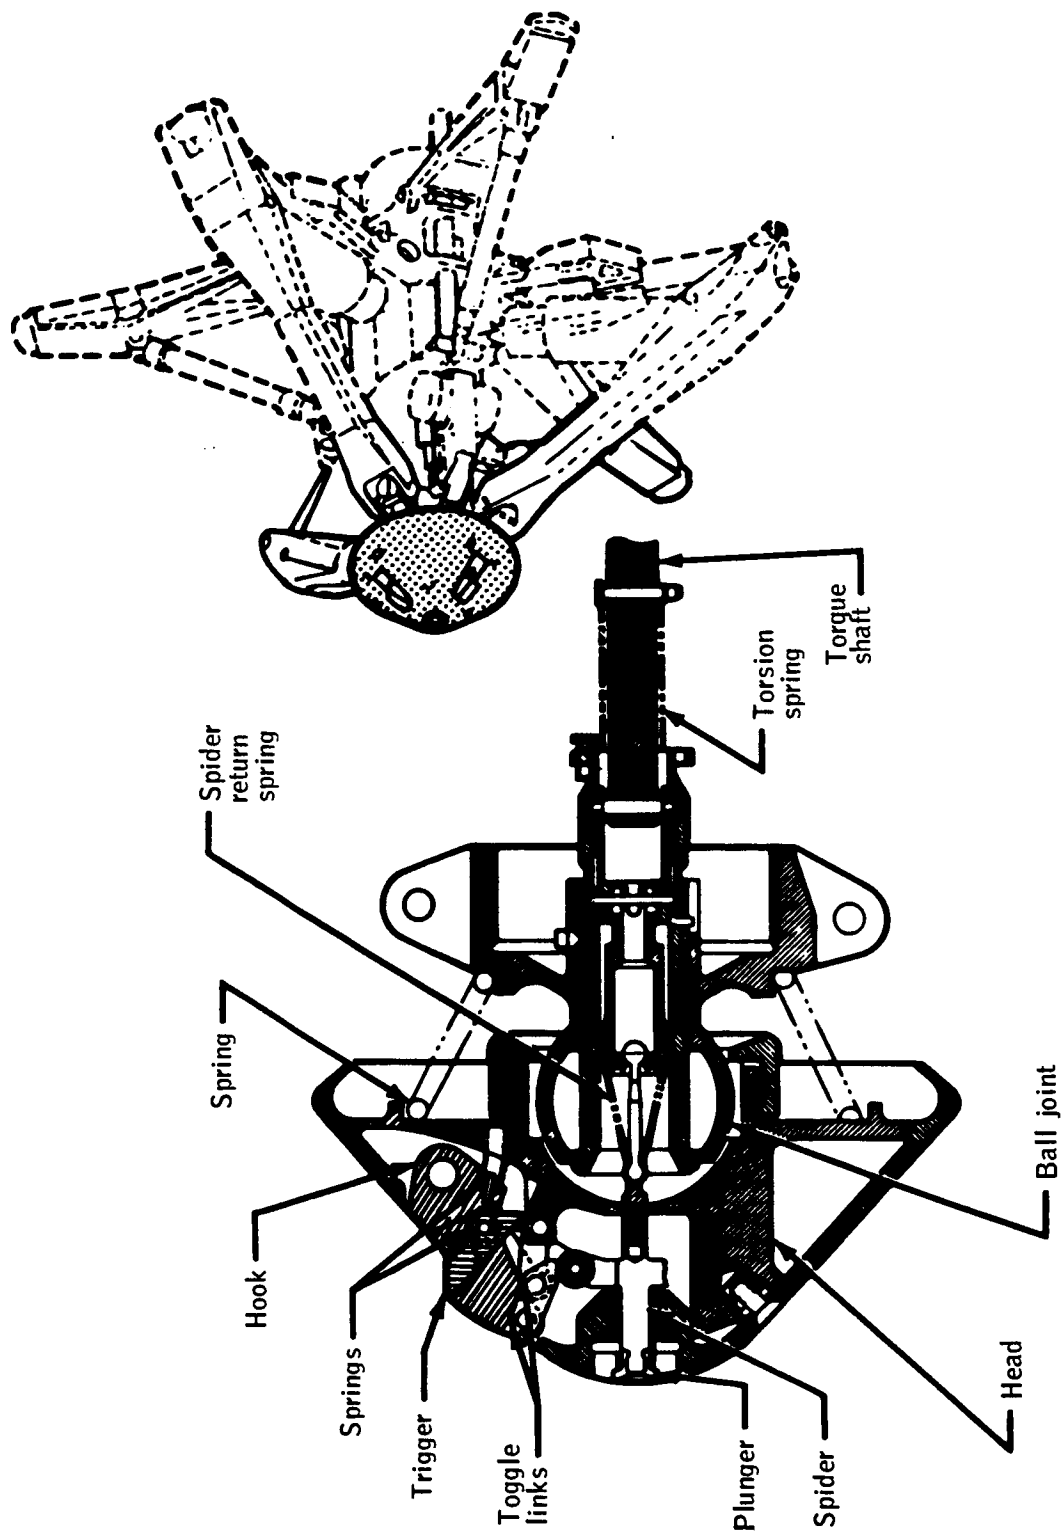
Probe capture latch assembly shown in locked position.
